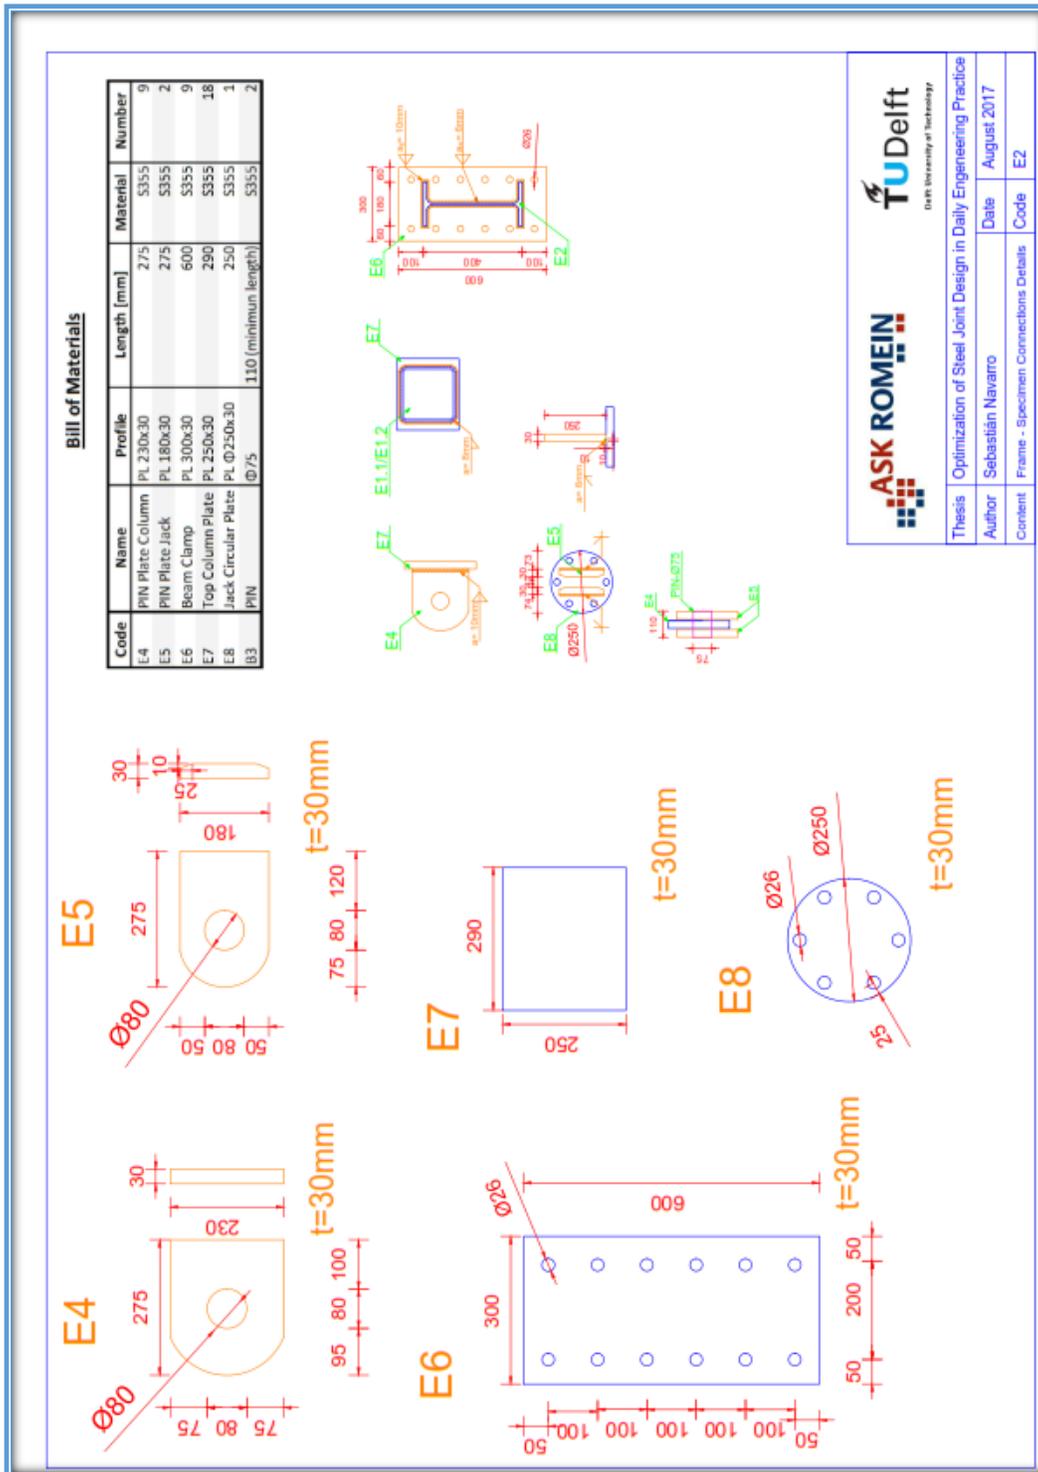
22: Workshop Drawings for the Connections to the Frame
